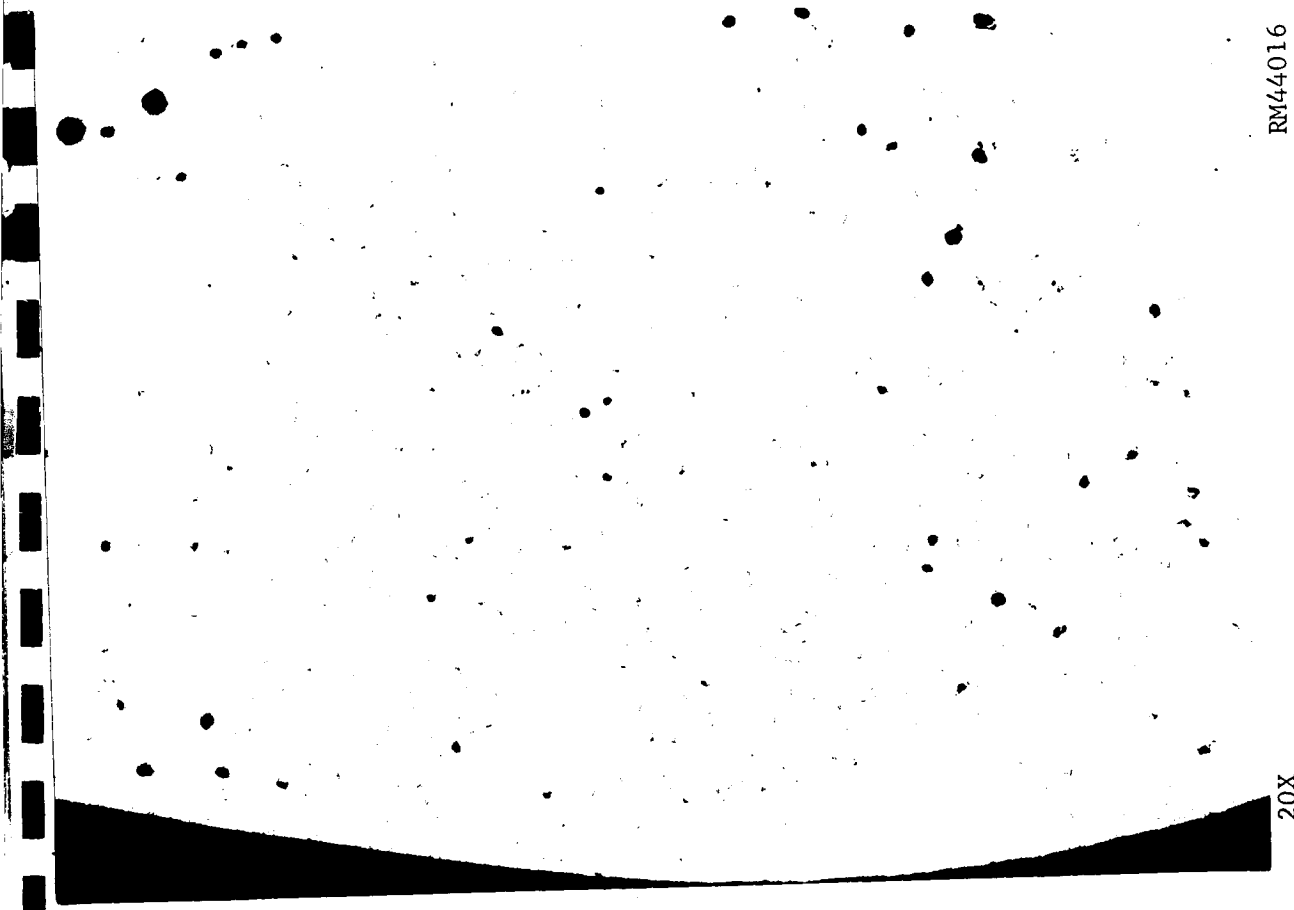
TYPICAL CROSS SECTIONS OF WELDS WITH X2319, TYPE 3 FILLER WIRE
